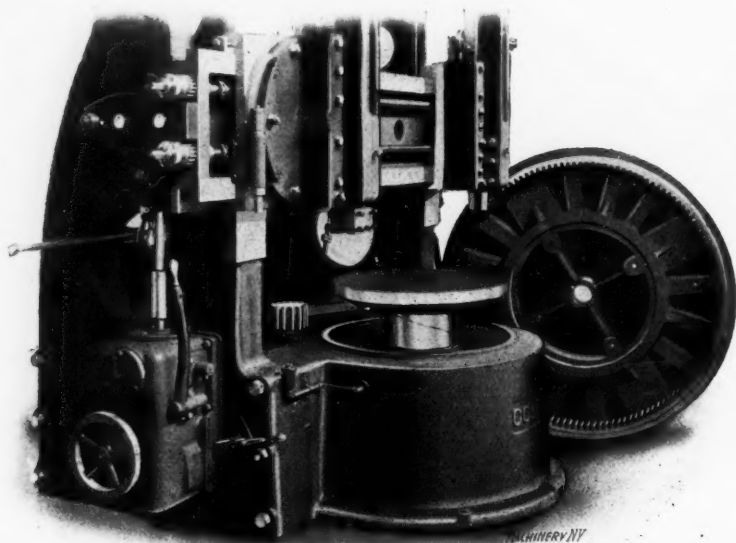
Details, showing Construction of the Spindle Bearing and Internal Gear Drive used on the 60- and 72-inch Mills
